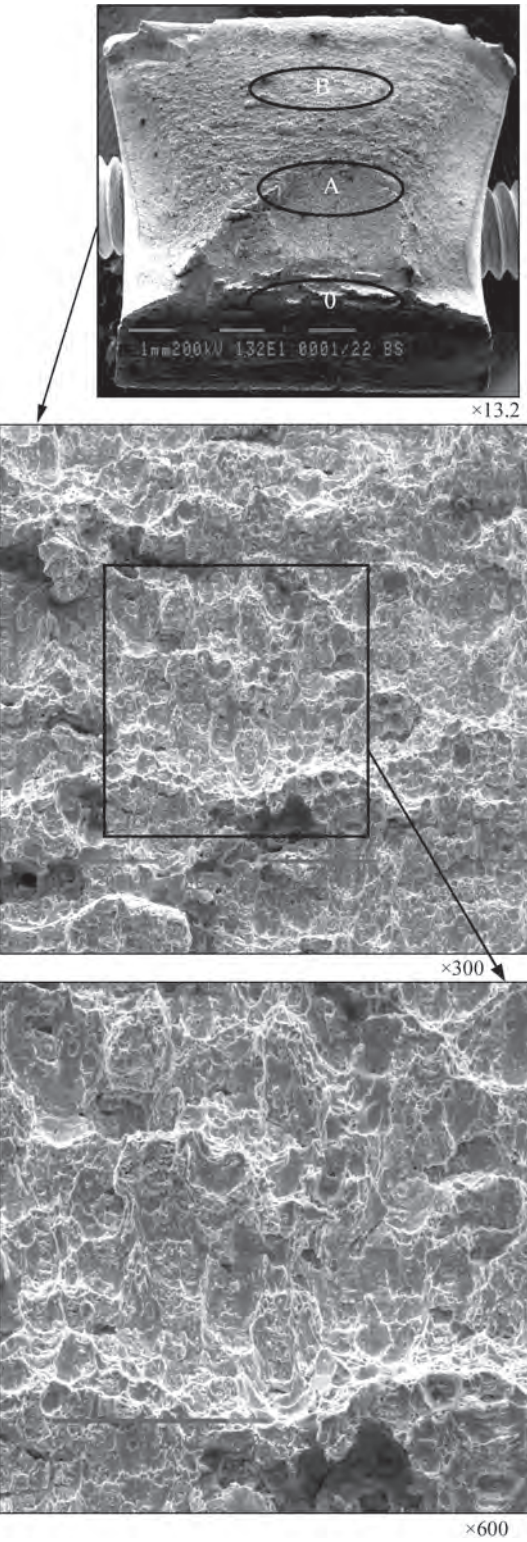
Photo with a fracture of welded joint specimens after impact bending test at -40 °C (zone of slow crack propagation)
